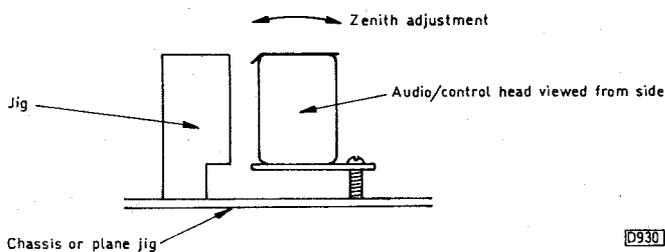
Zenith adjustment using a vertical jig. I use the reel disc height jig from the old Ferguson 3V00 VCR service kit but any suitable straight edge will generally do.
